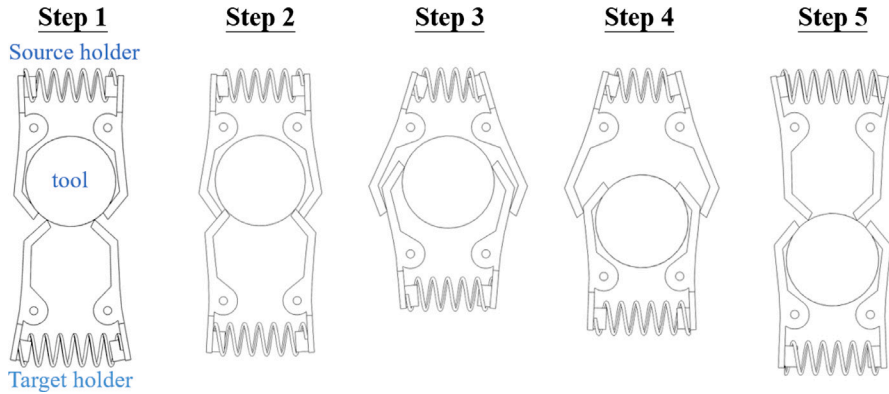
Steps of picking up an instrument. Upper: source holder. Bottom: target holder.
